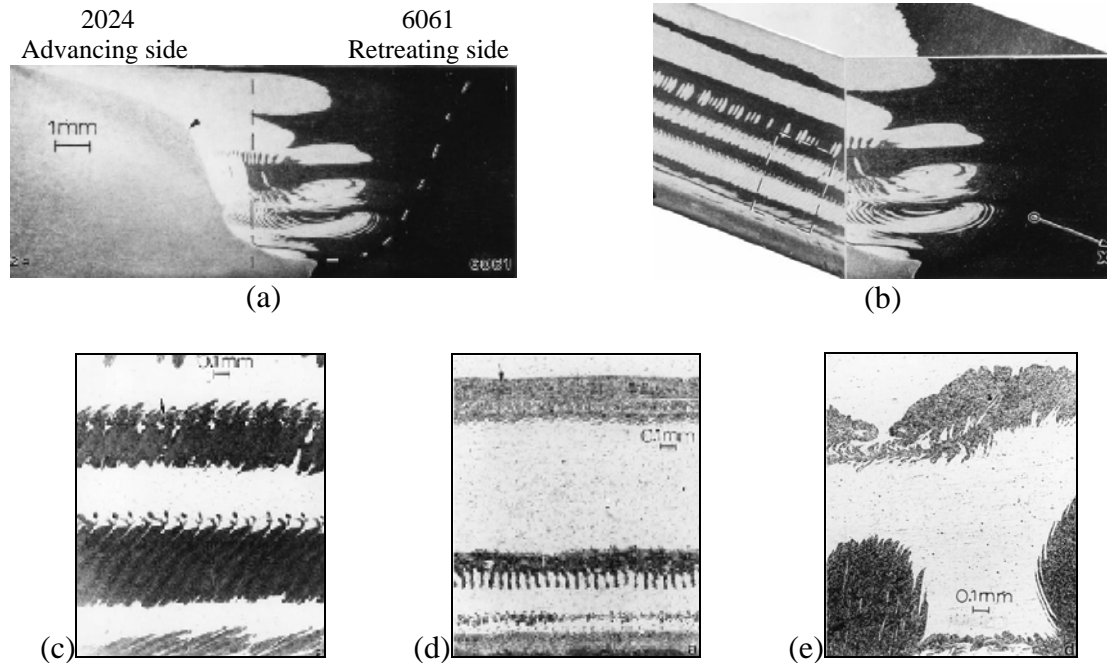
Dissimilar 2024-6061 weld showing macrographs for (a) weld face, (b) sectional view through the weld centreline, and micrographs for the sectional view welded at 60 mm/min and (c) 400 rpm, (d) 800 rpm, (e) 1200 rpm [47]
